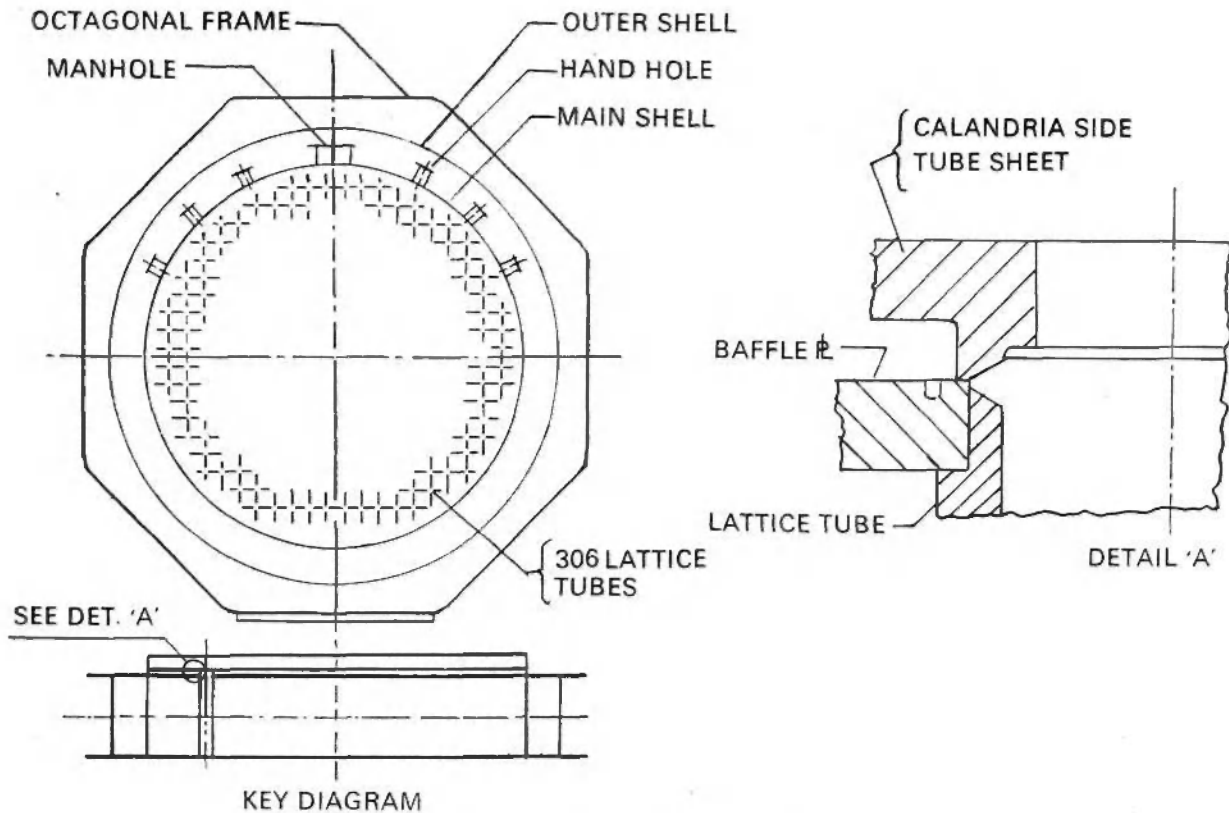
Joint Configuration for Welding CSTS Baffle Plate Lattice Tube
